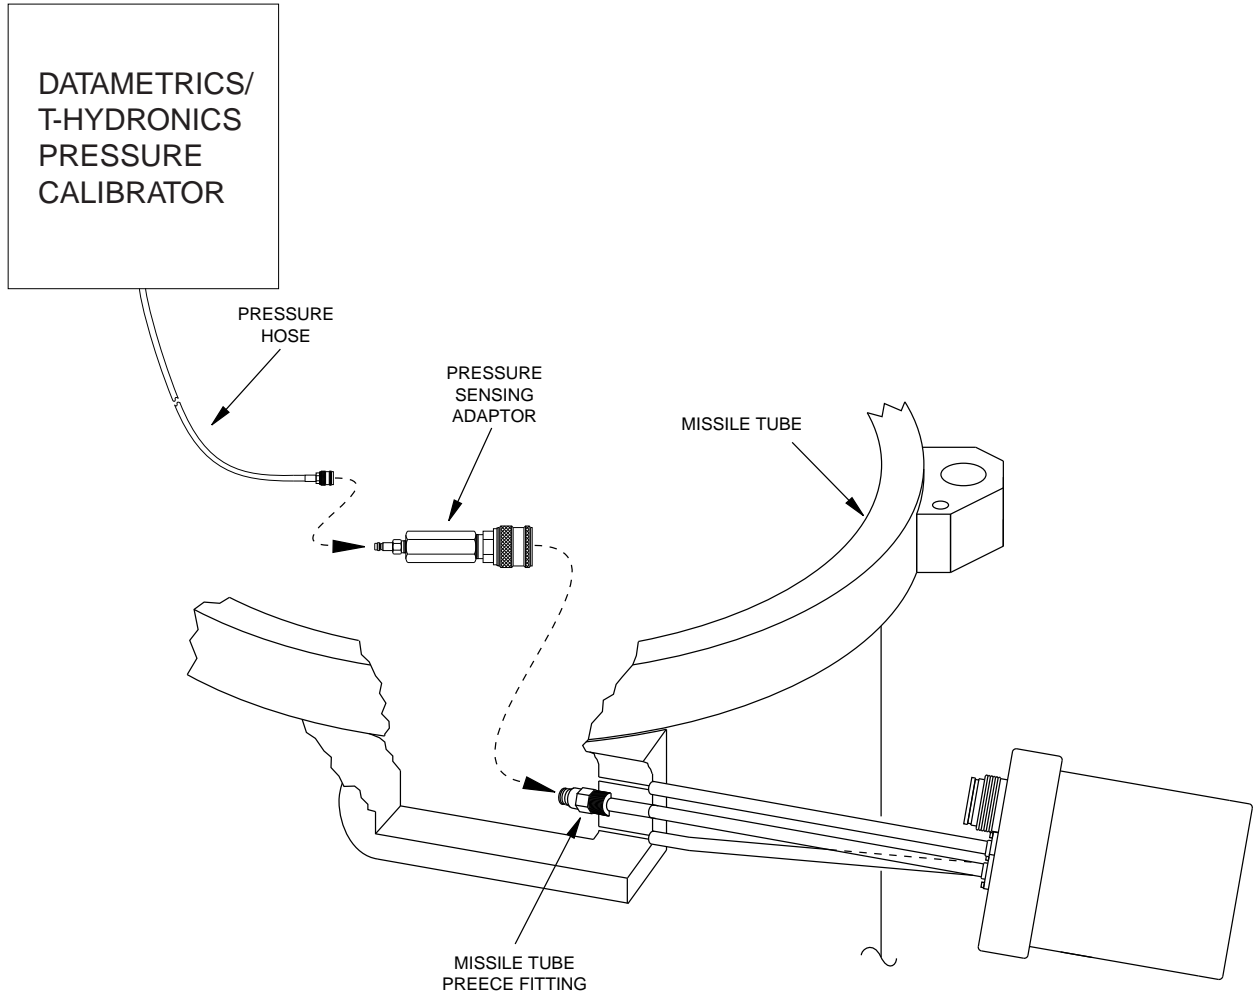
Missile Tube Preece Fitting Test Arrangement
